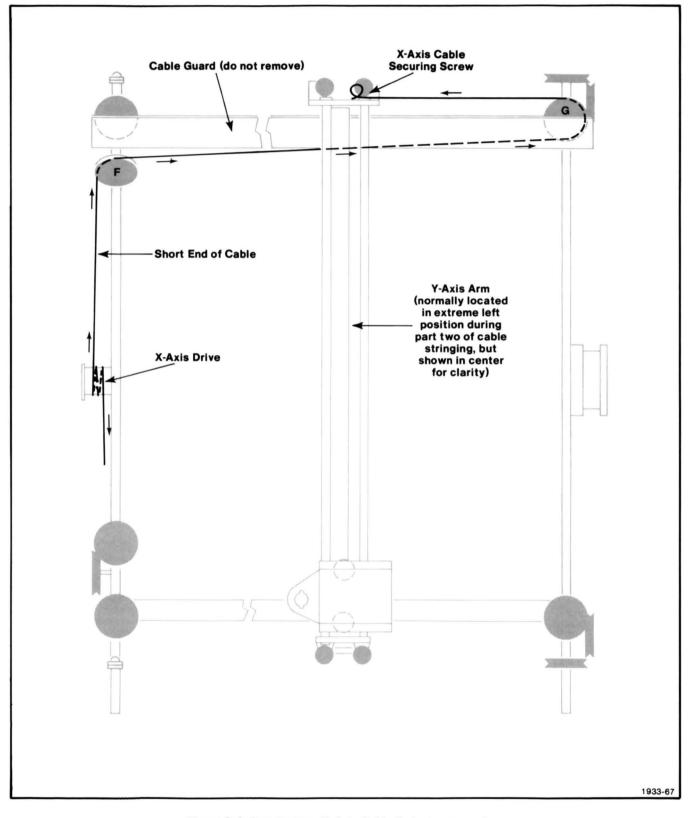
Part 2 of the X-Axis Cable Stringing Procedure.
